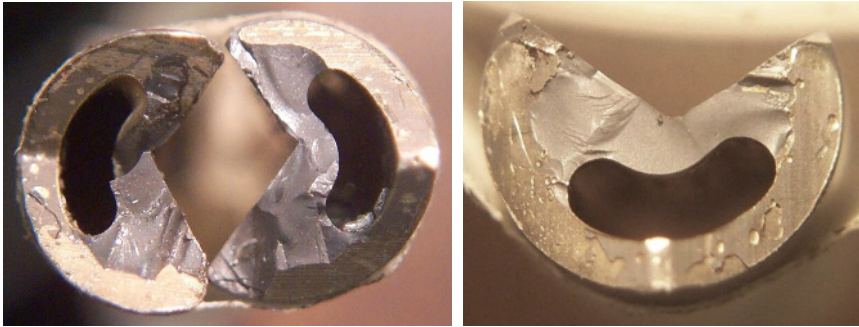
Shank corner radii: (a) as it appears on a shank cross-section, and (b) shank damaged by chips penetrating between the shank and the wall of the hole being drilled due to excessive corner radii
